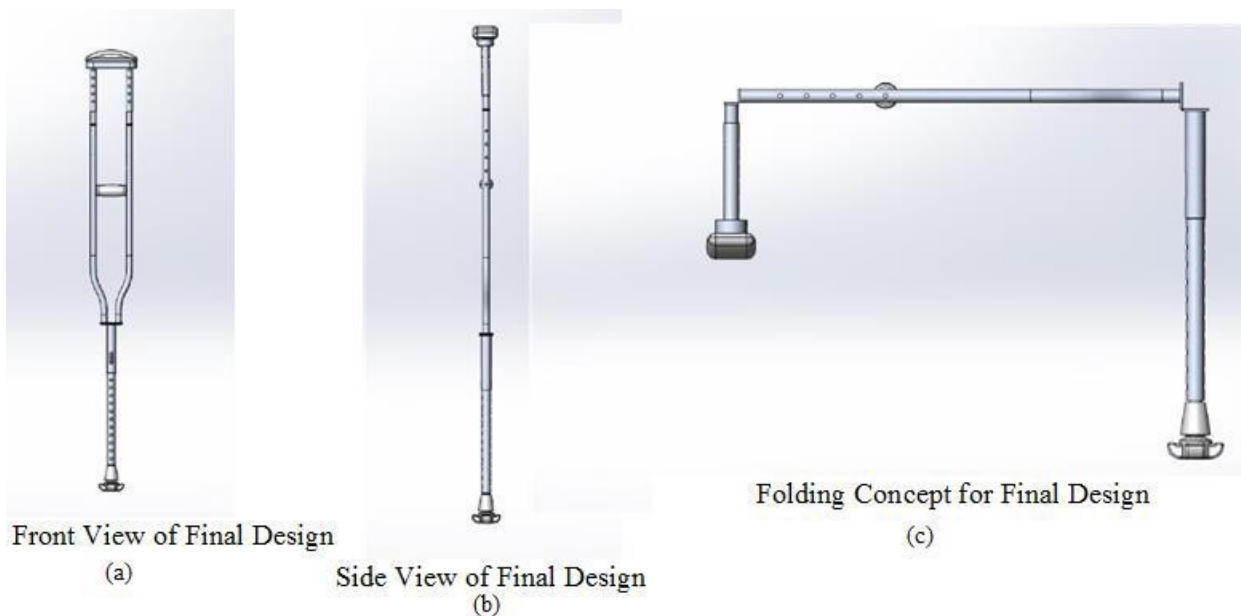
shows the different views of the Crutch, (a) Front view, (b) side view, (c) folding concept
